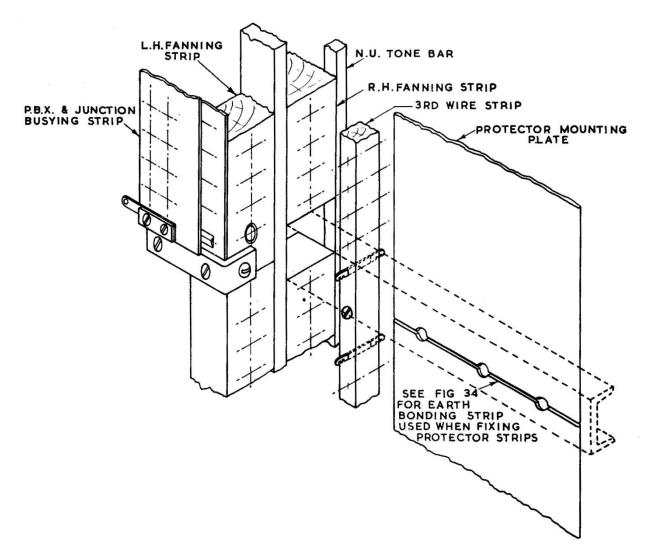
FITTING P.B.X. BUSYING STRIP, 3RD WIRE AND FANNING STRIPS AND PROTECTOR MOUNTING.
